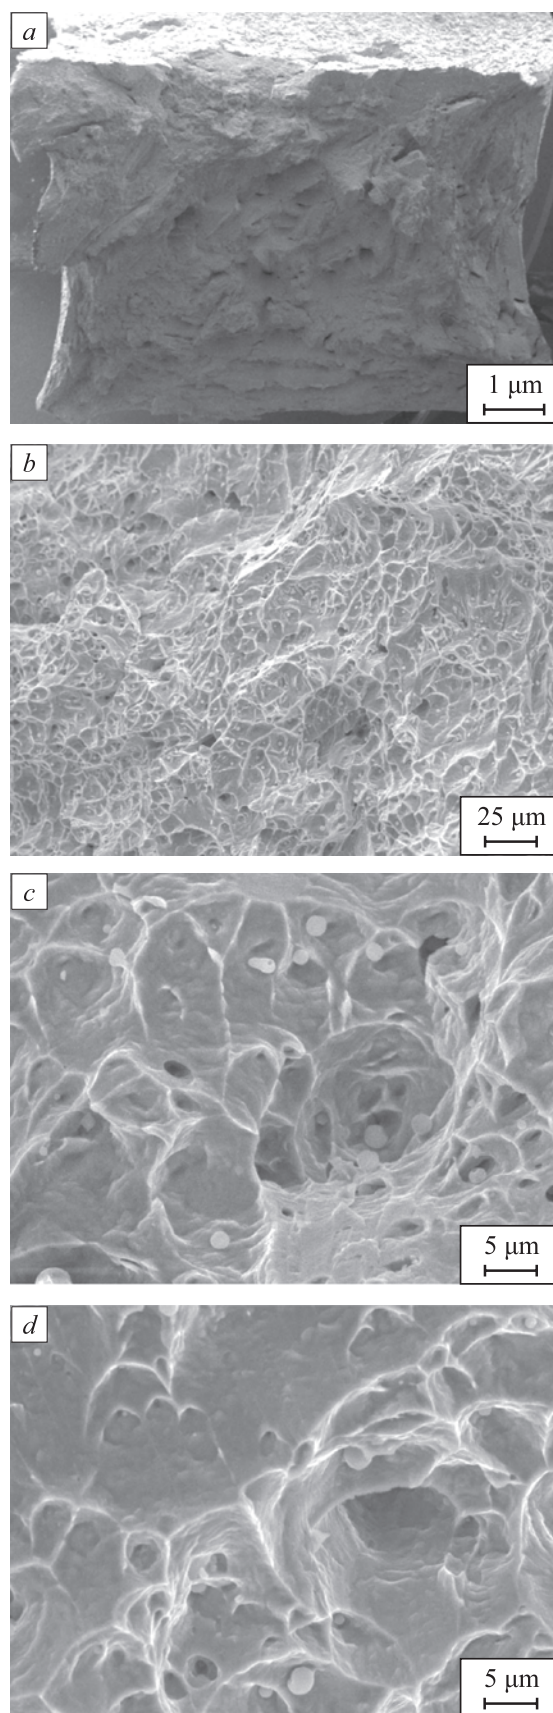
Fractography of the samples of welded joints after impact tests
